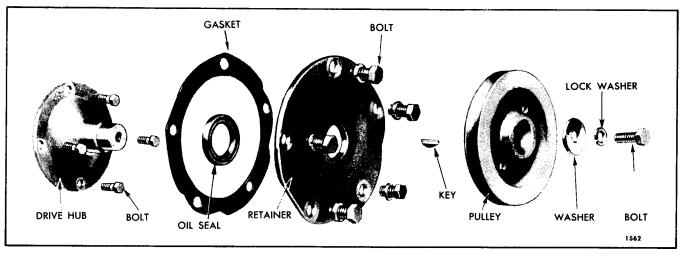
Components of Accessory Drive for Belt-Driven Accessory (Drive Hub Type)
